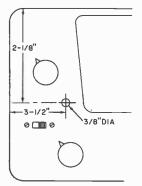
Before drilling R3/R4 mounting hole, check for adequate behind-panel clearance.
